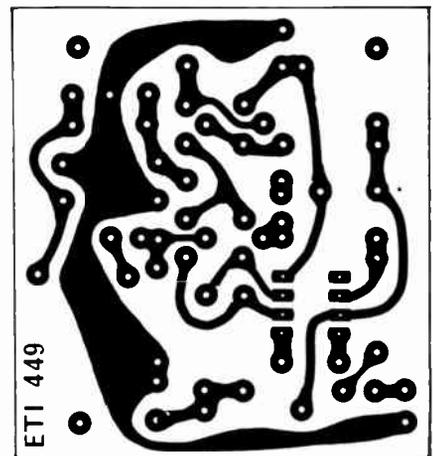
Printed circuit board layout. Full size 60 x 55 mm
